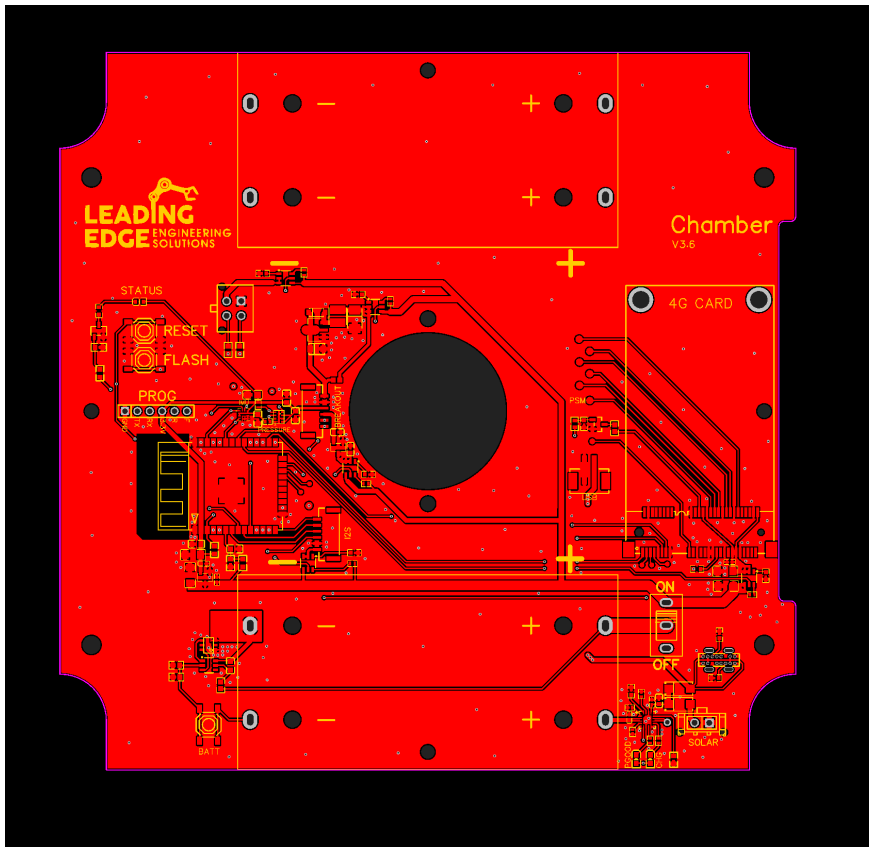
Electrical Schematic of the Breakout PCB located inside the chamber space.
